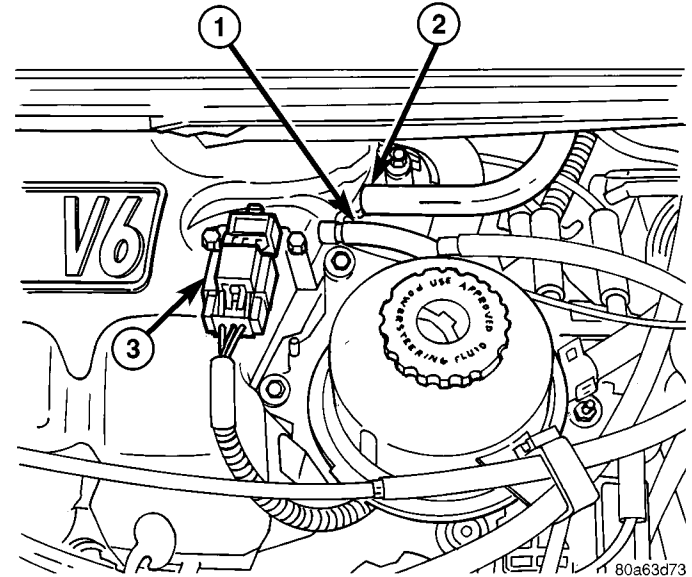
BRAKE BOOSTER & LDP VACUUM HOSES
